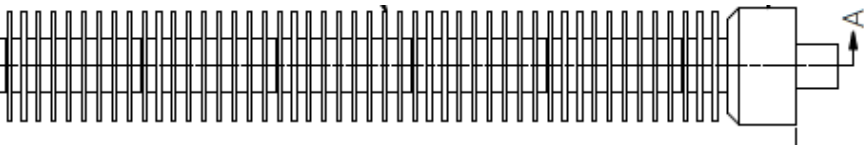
Standard Disc Corrosion Coupon on the CMMS Deployment Rod
